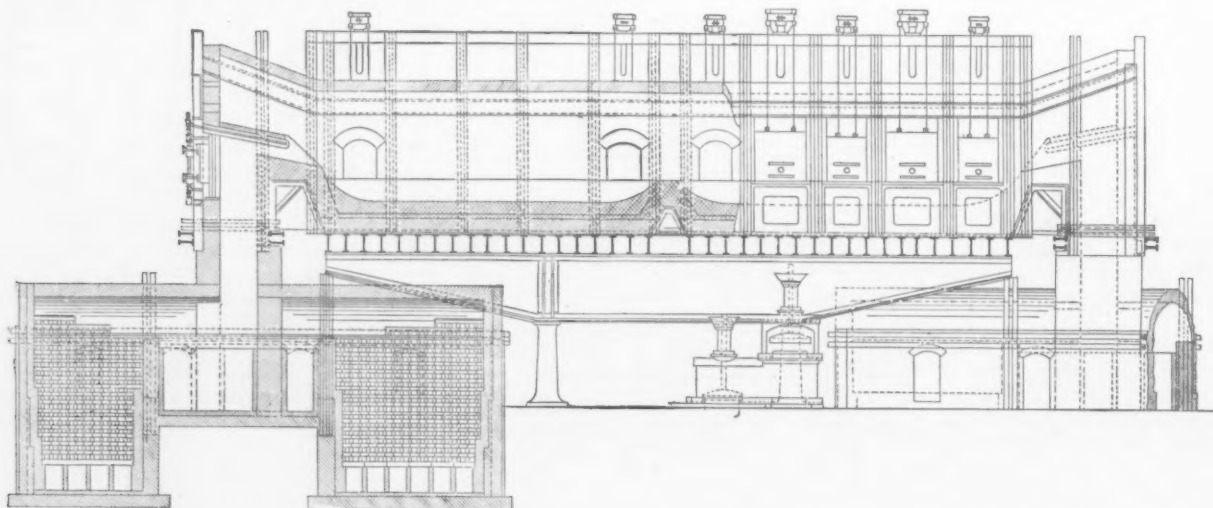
Elevation, Partly in Section, of Open Hearth Furnace with Bridge Wall in the Middle, Also with Blair Indestructible Port.
